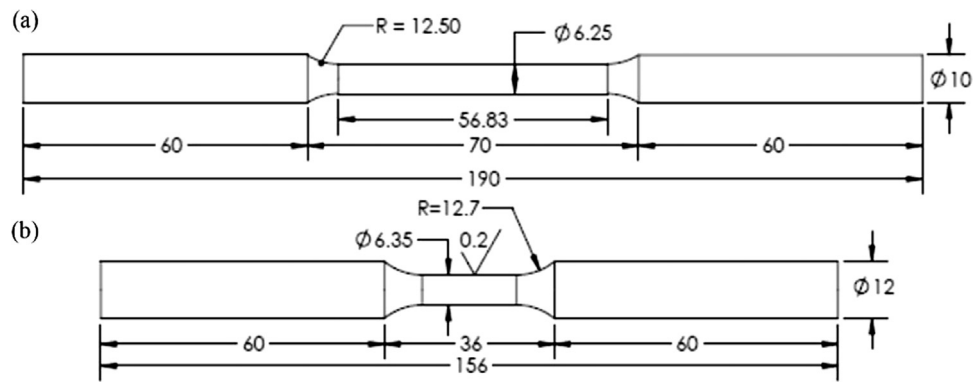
Details of the specimens: (a) tensile test and (b) LCF test (units in mm).
